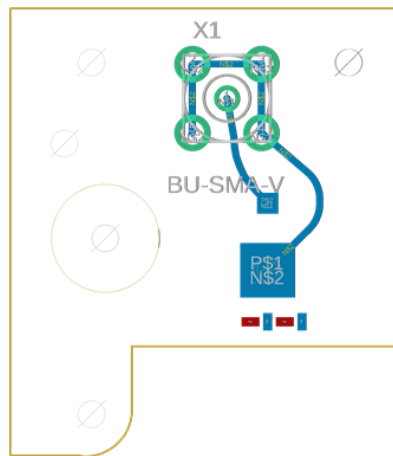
Detector PCB with connector and pad for diamond crystal.
